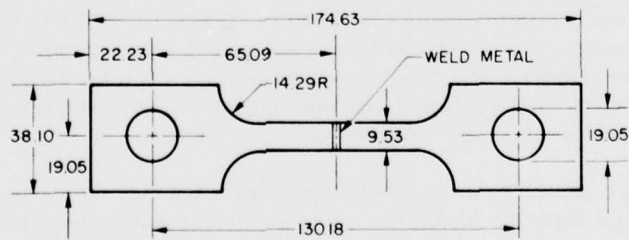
Transverse weld tension specimen (dimension in mm)
